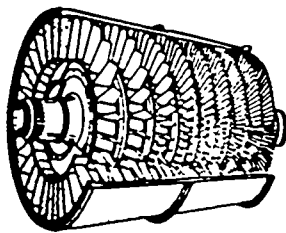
Illustrates the _____ Section of a Turbojet Engine.
